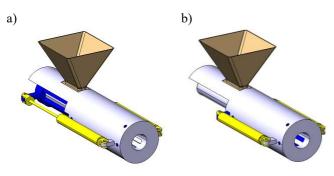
Grooved feed section with: a) fully open grooves b) completely closed grooves
